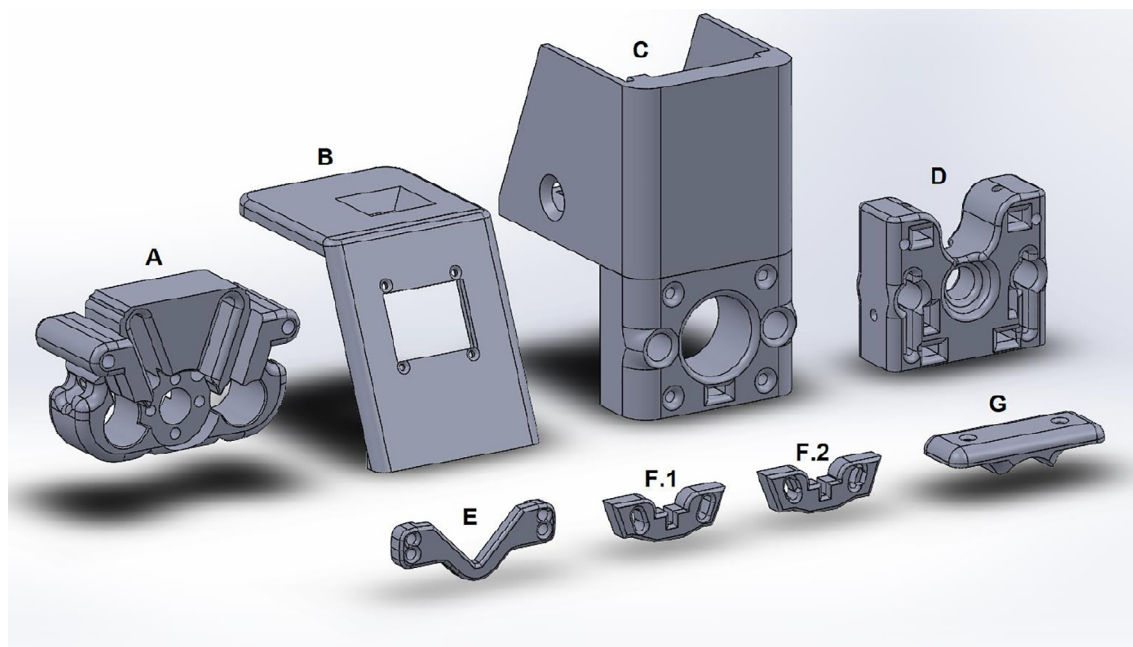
3D printed part of PPSP A) Plunger Mover; B) Screen Holder, C) Motor Holder and Electrical Cabinet; D) Syringe Support; E) Lateral Syringe Holder; F.1) Plunger Holder Front; F.2) Plunger Holder Back; G) Top Syringe Holder.
